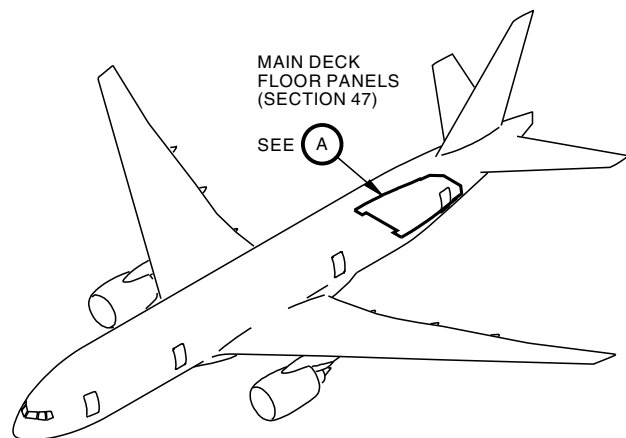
ZONES 241/242 PASSENGER FLOOR PANELS
